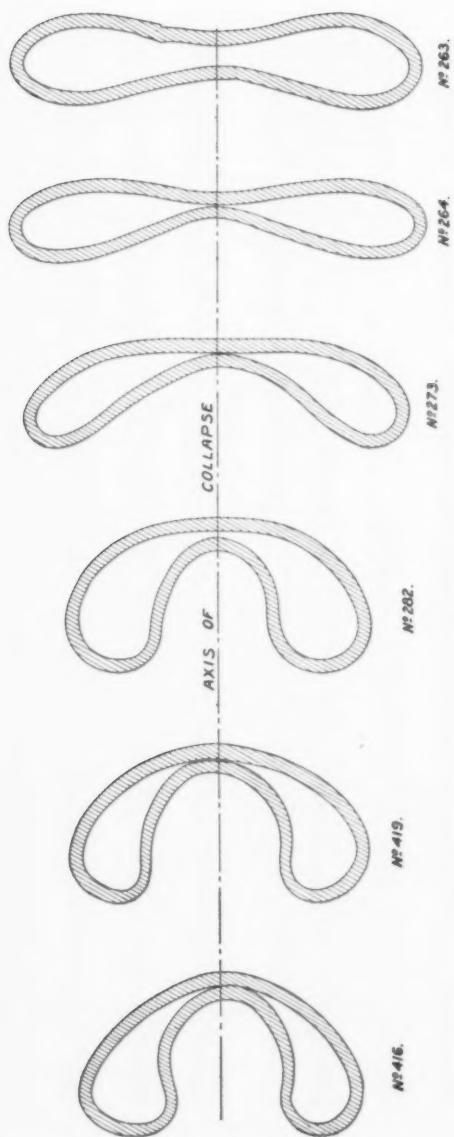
COLLAPSE SECTIONS OF TUBES FROM COLLAPSING TESTS ON NATIONAL TUBE CO.'S LAP-WELDED BESSEMER STEEL TUBES CONDUCTED BY PROF. R. T. STEWART.
